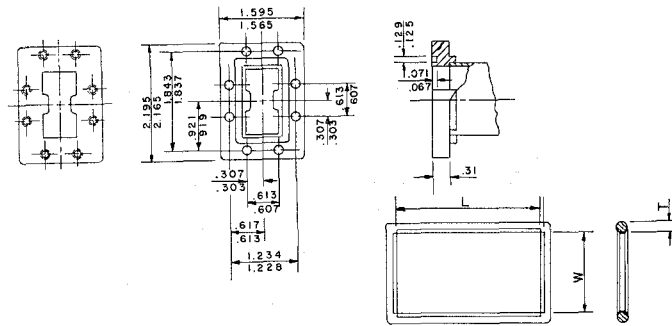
Hole patterns and flange details for double-ridge guide, as in Fig. 6.
